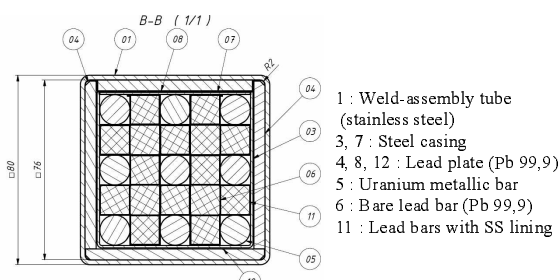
Cross-section of a fuel sub-assembly in the fuel part – Final design.
